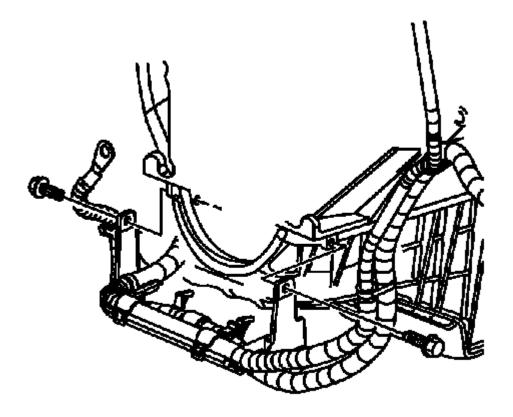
View Of Battery Cable Bracket Bolts Courtesy of GENERAL MOTORS CORP.
